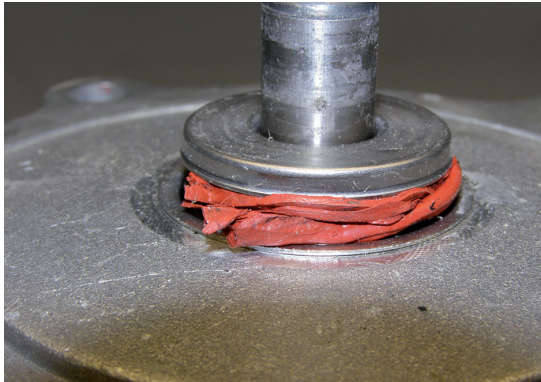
Hardened sealant on pump shaft between housing and impeller (disassembled)
